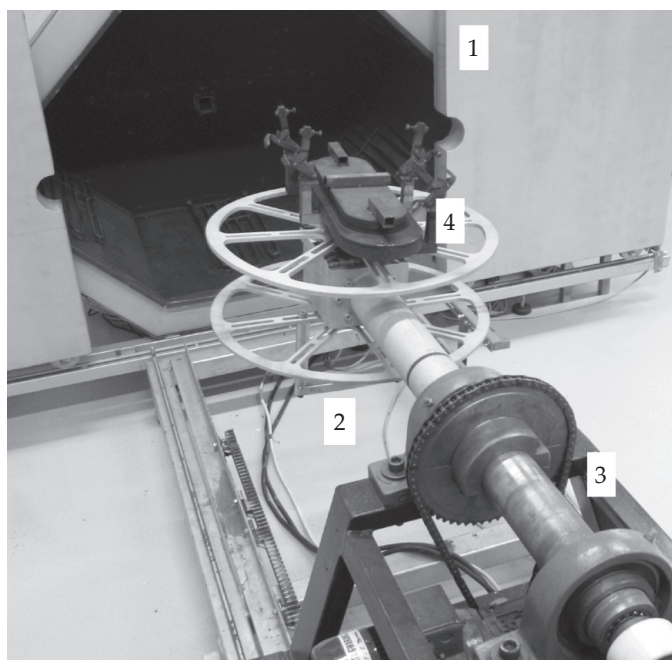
Single-arm shuttle rotational molding machine: 1 – oven, 2 – clamping space, 3 – gear, 4 – steel mold
